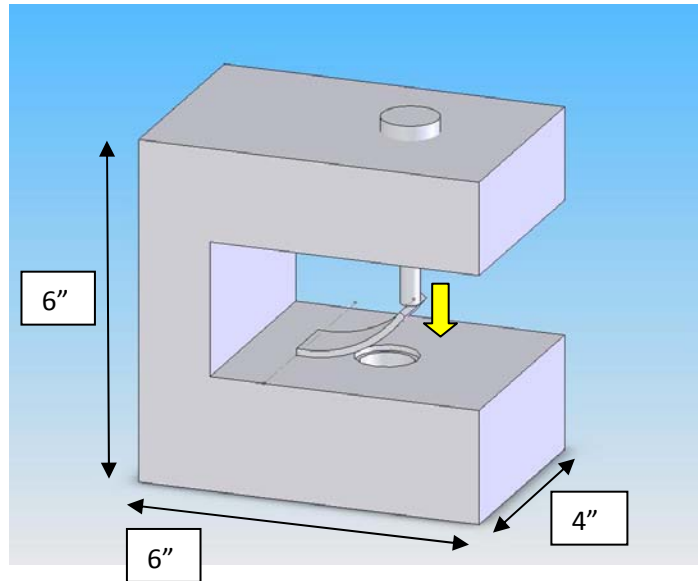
Rolling punch design utilizes linear actuator in conjunction with thin, bent piece of metal to punch pills out of their packaging
